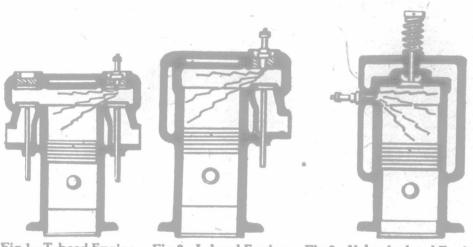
T-head Engine. Fig.2-L-head Engine. Fig.3-Valve-in-head Engine.
